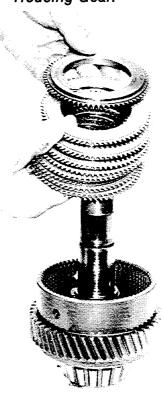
Removing or Installing Clutch Plates and Back Plate on Reverse Housing Gear.
